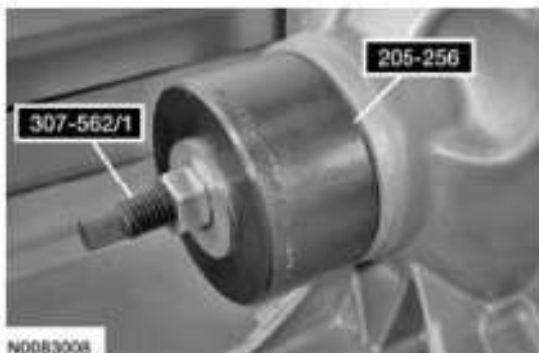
Installing Front Wheel Hub Oil Seal Installer 205-256 On Needle Bearing Remover 307-562/1
